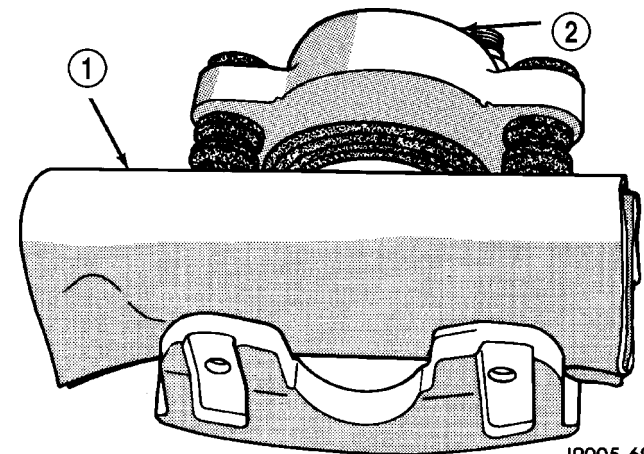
PADDING CALIPER INTERIOR - TYPICAL
